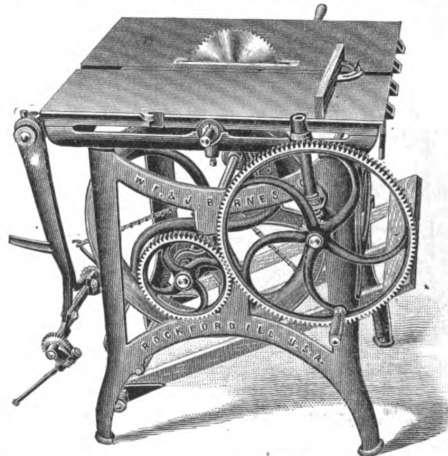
View of the Machine with the Self Feed Arrangement and Rip Gauge Thrown Back.
